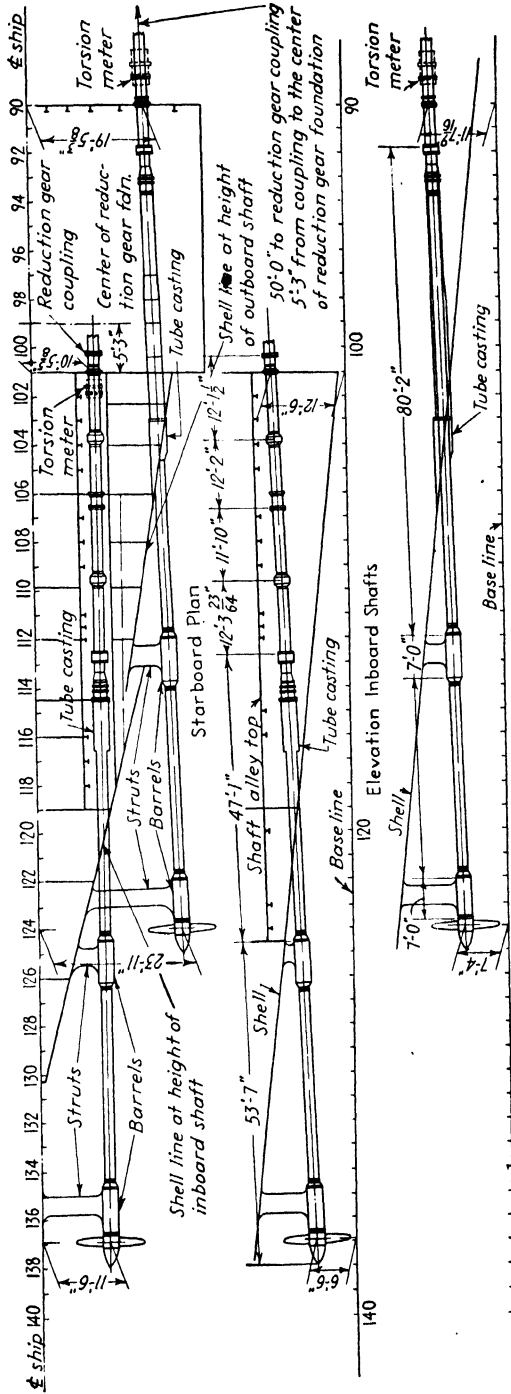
Arrangement of shafting in a vessel with locations of struts and tube castings.
